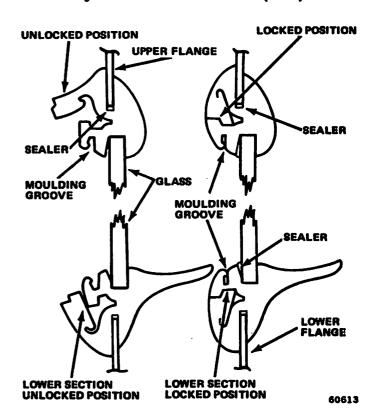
N-2 Windshield Weatherstrip Cross Section—Mexicing Removed
